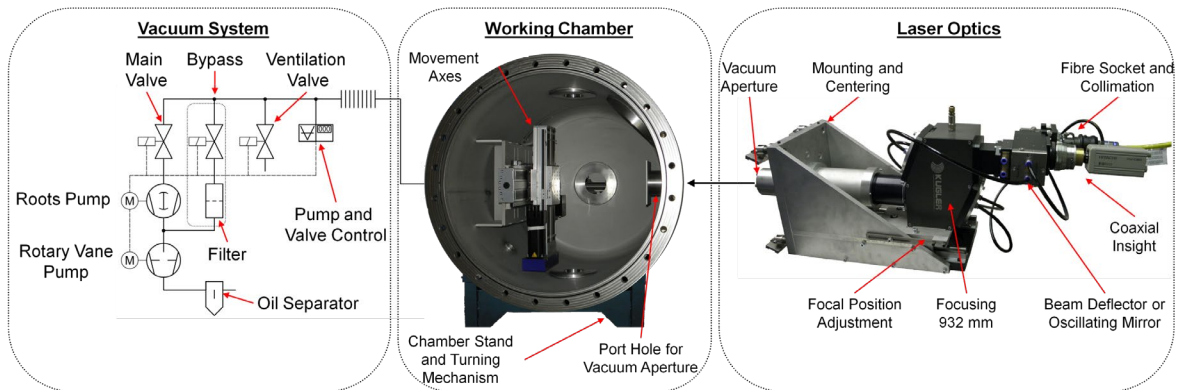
Welding setup for thick plate laser beam welding under vacuum
